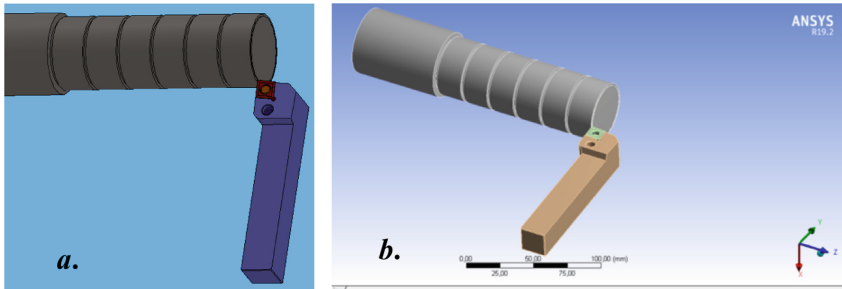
3D model for assembly workpiece-tool: *a*. developed in SolidWorks; *b*. exported in Ansys Workbench.
